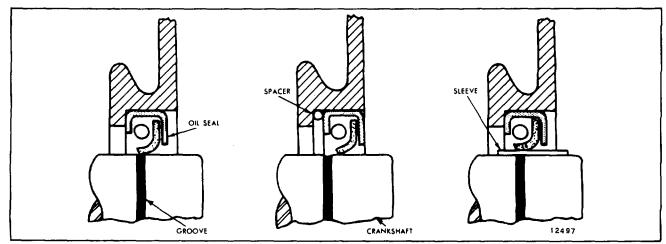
Use of Rear Oil Seal Spacer or Sleeve on Grooved Crankshaft.
